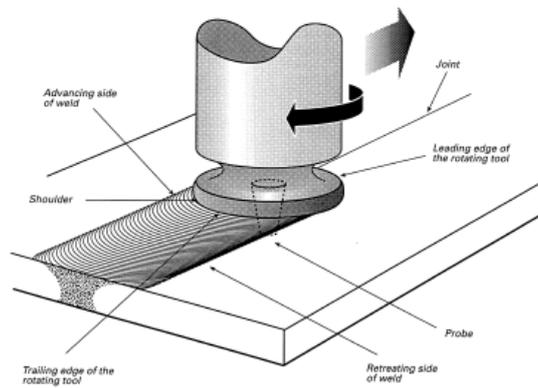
Illustrated of friction stir welding Source: Thomas et al (1997)
